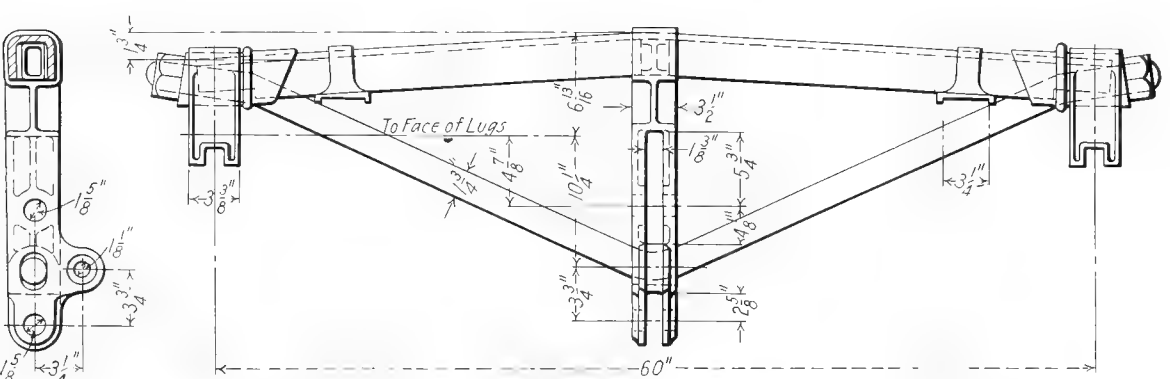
No. 7 Buffalo Trussed Brake Beam. Buffalo Brake Beam Company.
